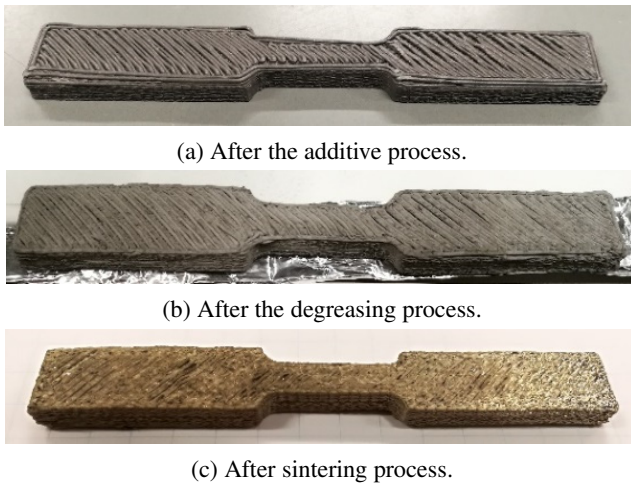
A specimen fabricated using the FFF-type AM machine.
